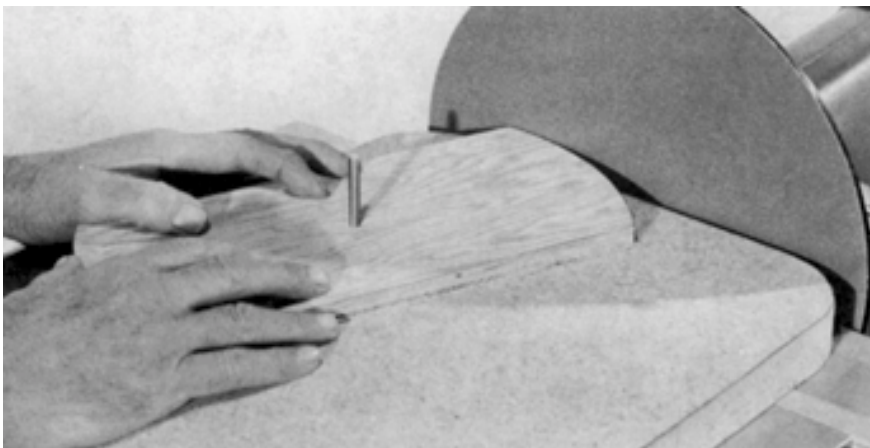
Construction details of a guide for sanding curved workpieces to a uniform width.
